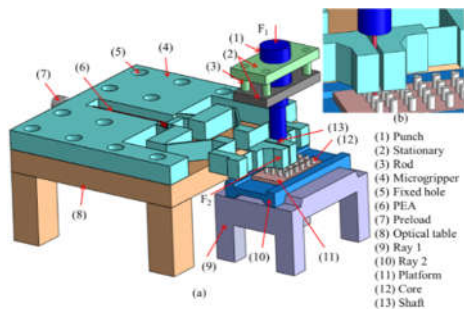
Assemble system for the mini vibrating motors: (a) Assembling system, (b) Details of motor shaft and core.
